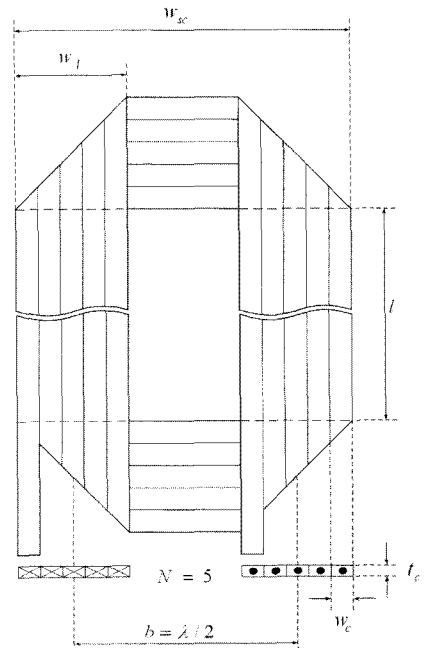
Planar view and cross-sectional view of a folded-corner rectangular type spiral coil
